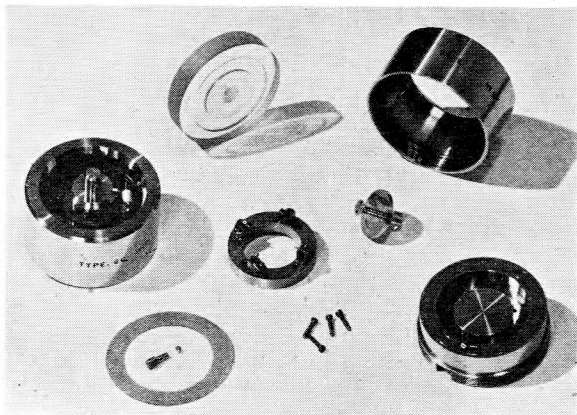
COMPONENT PARTS AND FINISHED CRYSTAL UNIT ON B7G BASE.
